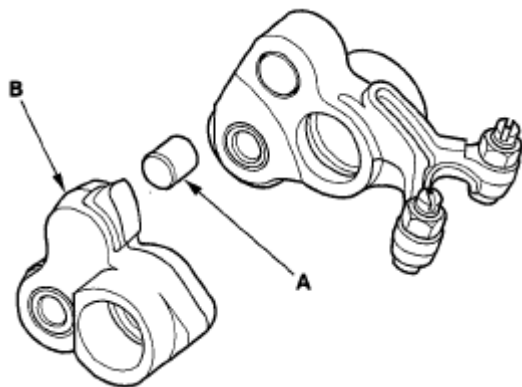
Identifying Rocker Arm Piston And Intake Primary Rocker Arm
